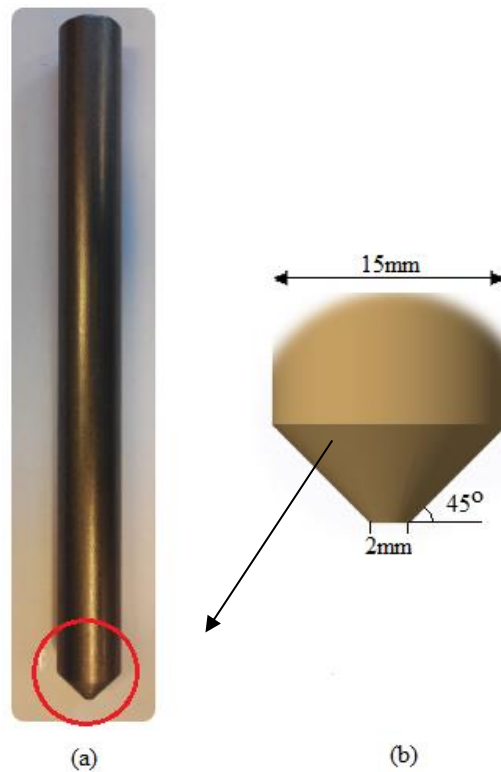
Consumable rod (a) Structural steel test piece. (b) Tip geometry of test piece
